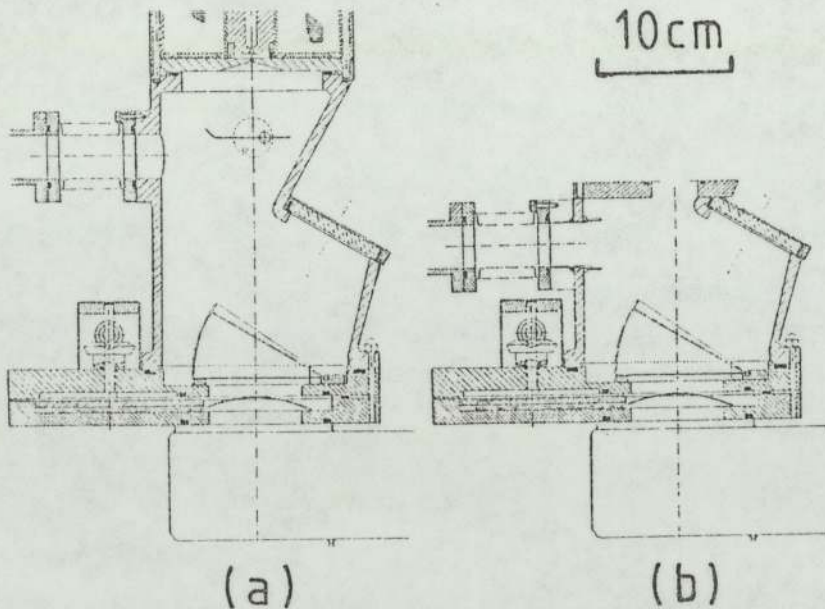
Cross-sectional drawings of (a) standard EM6 and (b) the heavily modified experimental viewing chamber.
